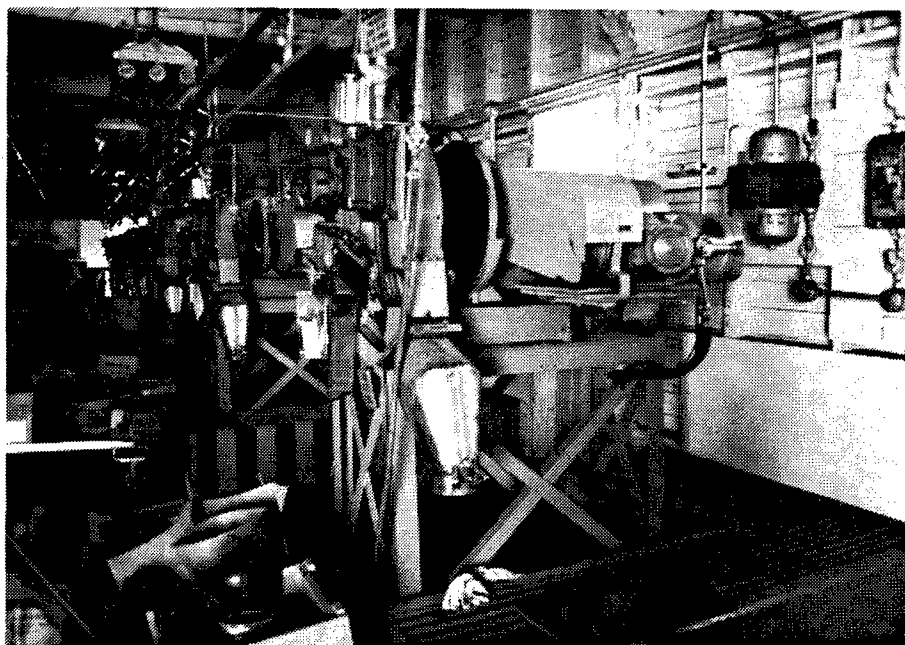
Building 1513: Cutting machine manufactured by McKiernan-Terry Company Manufacturing and Engineering, Dover, New Jersey.
